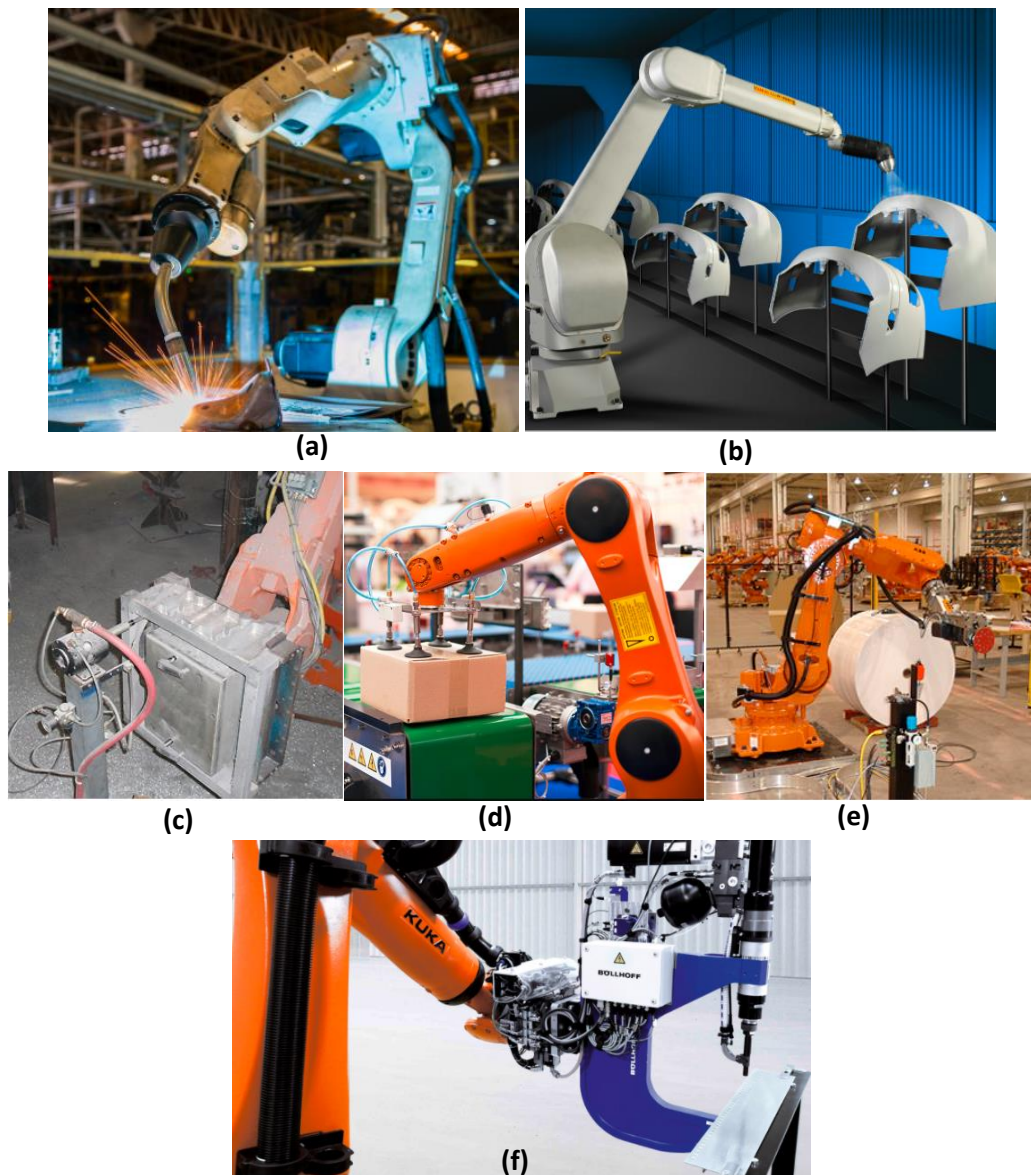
(a) welding robot,(b) painting robot,(c) deburring robot,(d) material handling robot,(e) paper roll finishing robot, (f) self-pierce riveting robot[57][58][59]
